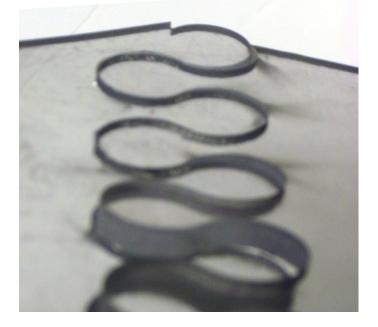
Balance between fitting tolerances and the constraints of assembly tolerances. The first nodes lock into place but prevent the following nodes to reach their position due to a fitting tolerance that is too tight.
